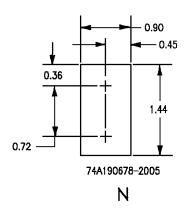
Transmission Seal Assembly, 74A190678, Replacement (Sheet 4)
